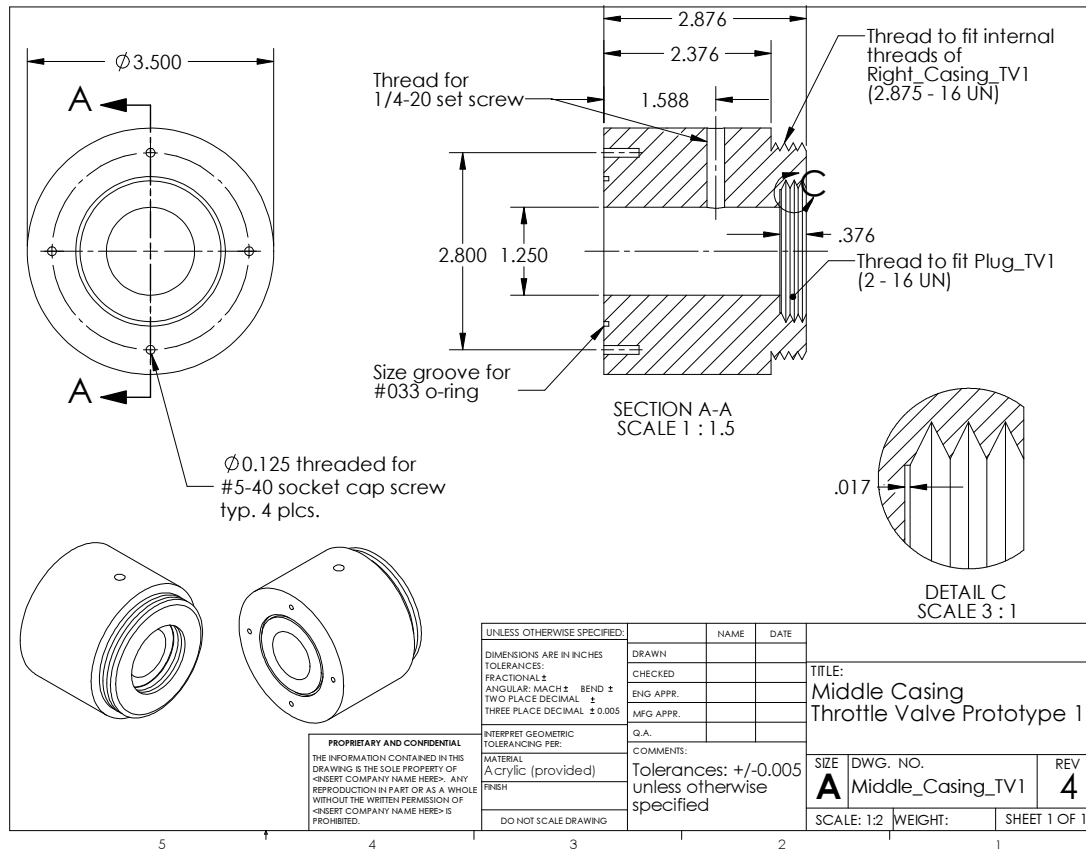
Middle casing component drawing for barrel valve prototype (TV1).
